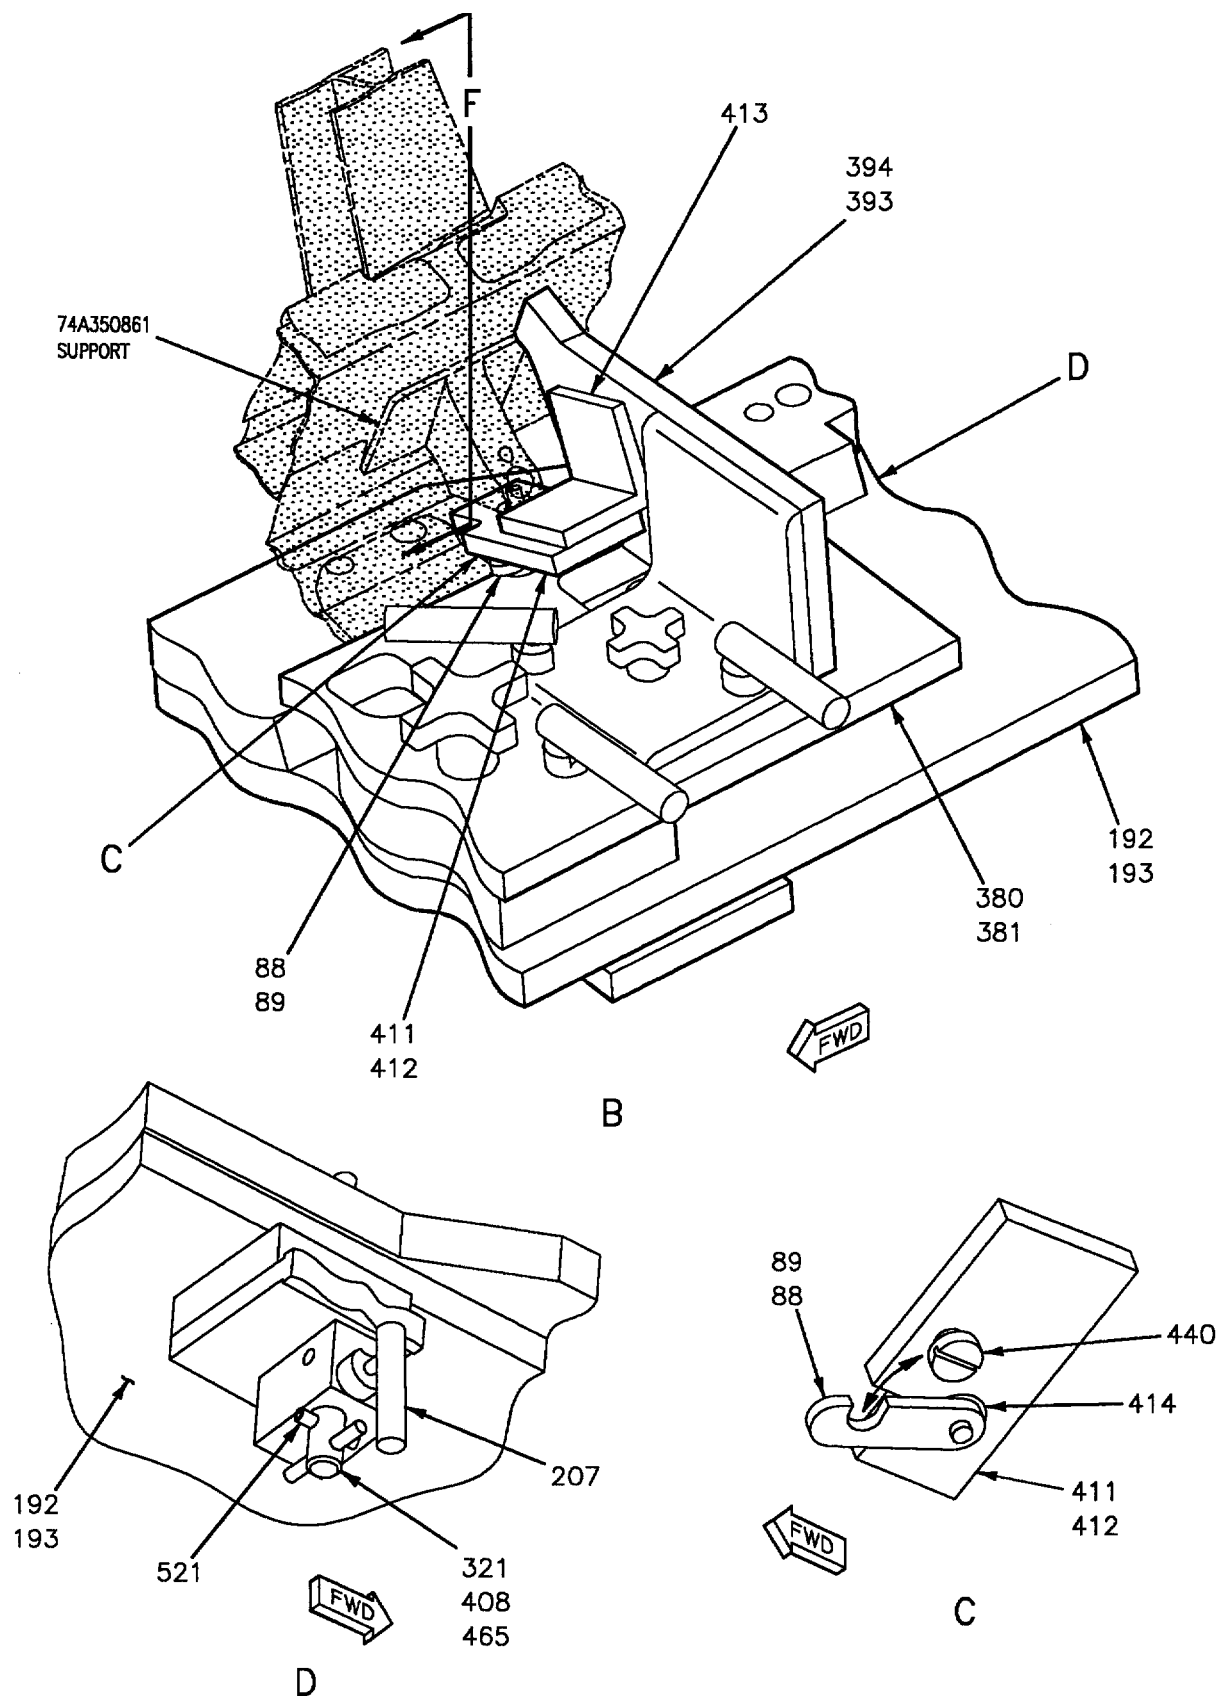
Replacement - Aft Rocket Motor Support (Sheet 3)
